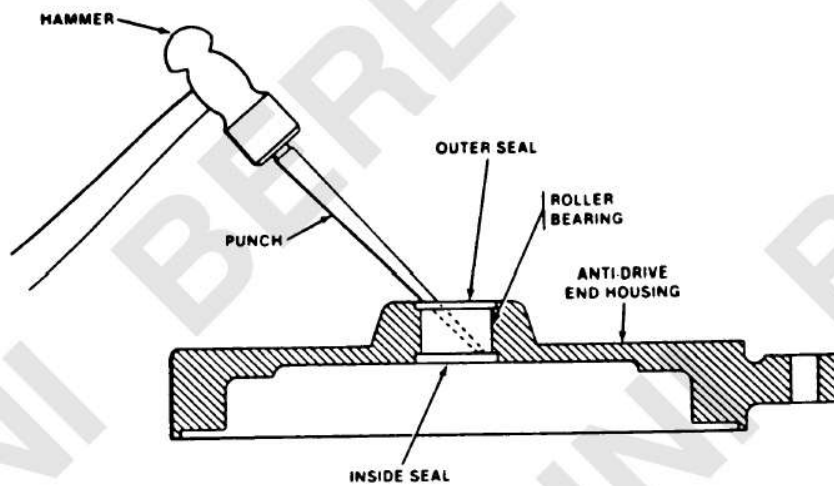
Inside Seal Removal from Anti-Drive End Housing.
